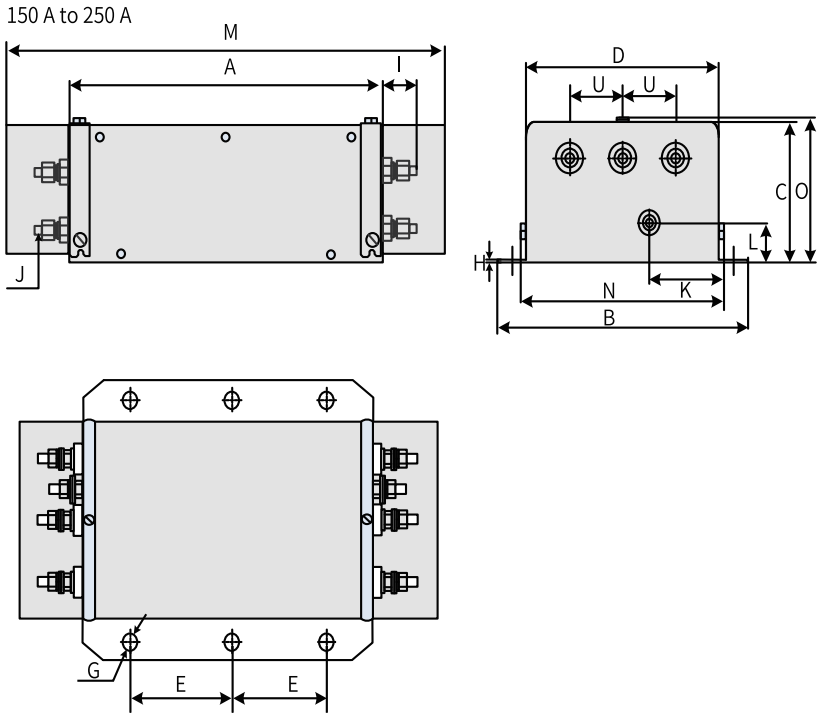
Dimension drawing of FN 3359 series filters (150 A to 250 A)
